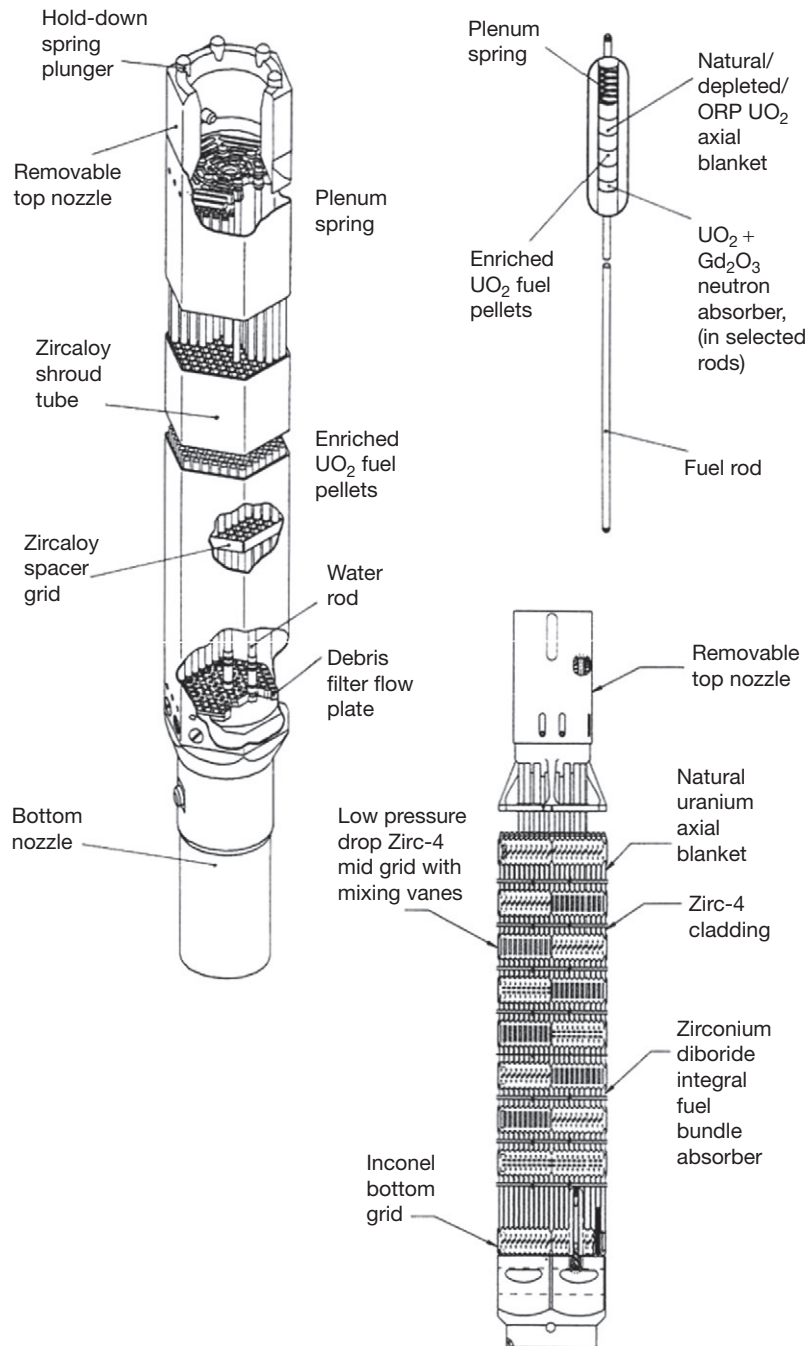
Example Westinghouse VVER-1000 fuel assembly. Reproduced from Tarlton, S., Ed. *Nucl. Eng. Int.* 2008, 53, 26–36.
